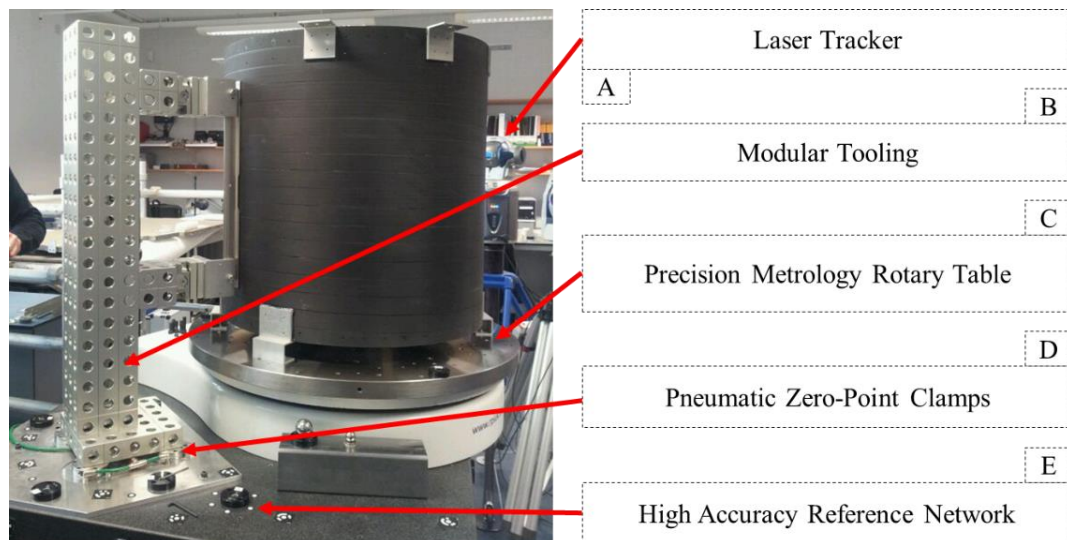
Technology demonstrator assembly tooling located on granite bed.
